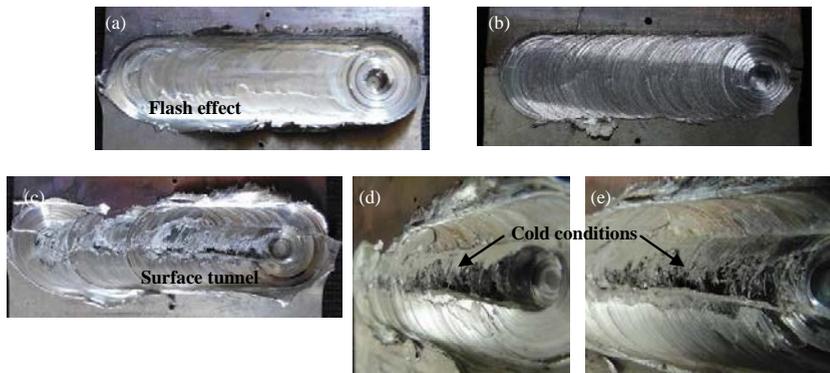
visual observation of welds by cylindrical tool pin profiles; (a), PD: 6 mm (b), PD: 8 mm and (c, d, e) PD: 10 mm
